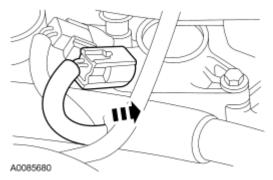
Ignition Coil Electrical Connector Courtesy of FORD MOTOR CO.
